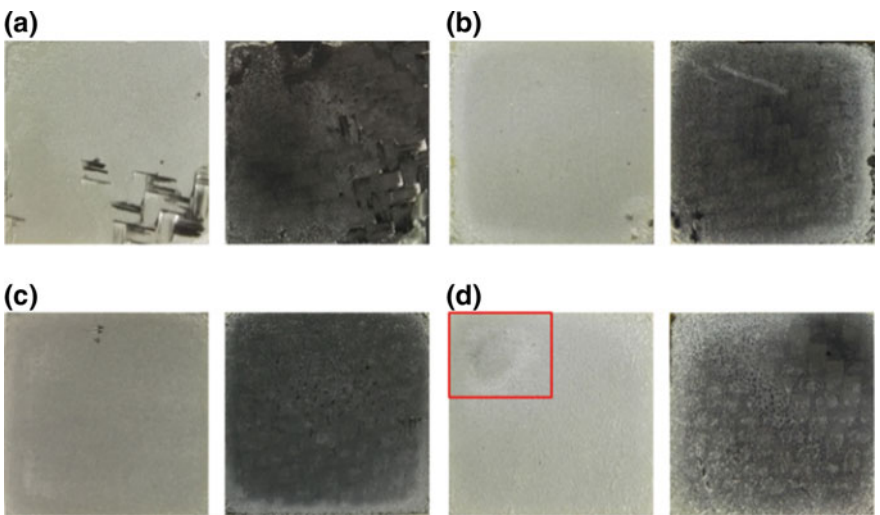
Representative fracture surfaces of adhesively bonded joints: a unaged; b HC; c HC + SL; d HC + AL
